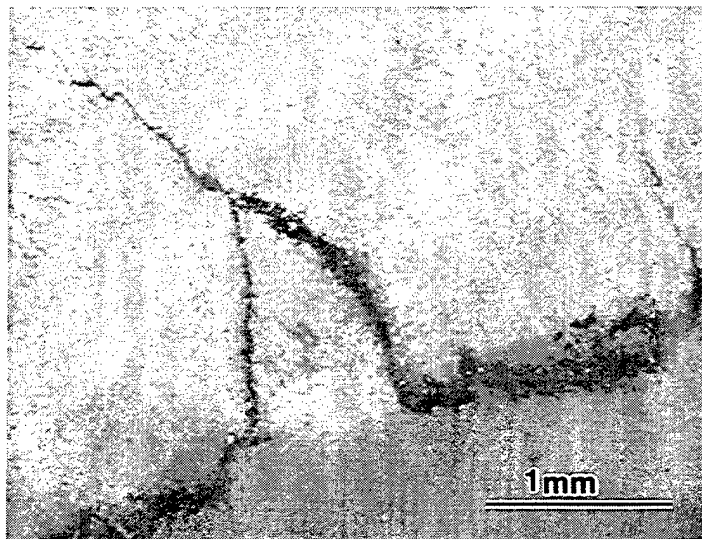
Underbead cracking second from top. Cracking progressed into the weld metal along the columnar grains. Note the subsequent pass HAZ within the weld metal. UWW03
